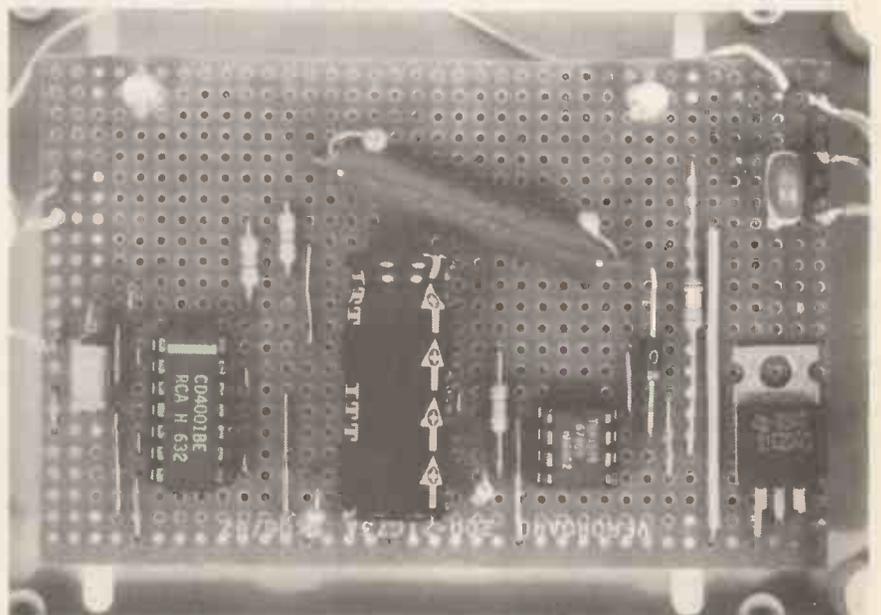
Stripboard component layout, interwiring and details of breaks required in underside copper strips. (below) The completed board showing the high wattage resistor R5.
